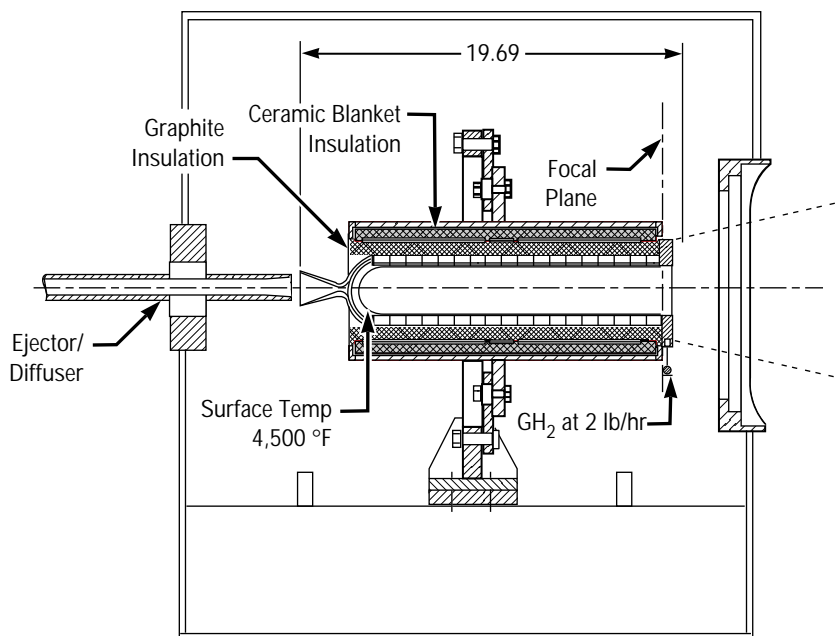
Prototype absorber/thruster mounted in vacuum test chamber.
